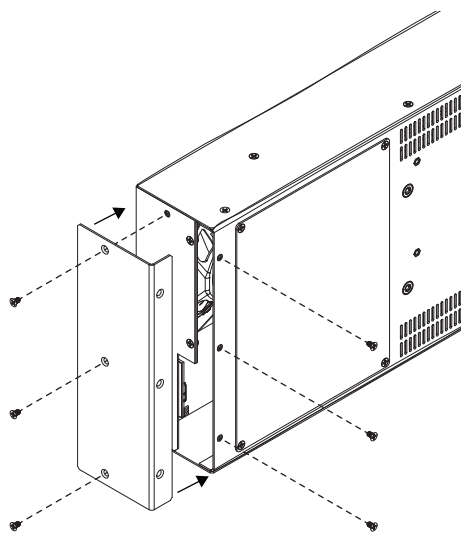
Re-installing the Left End Bracket on the Ultritouch-4 Panel
